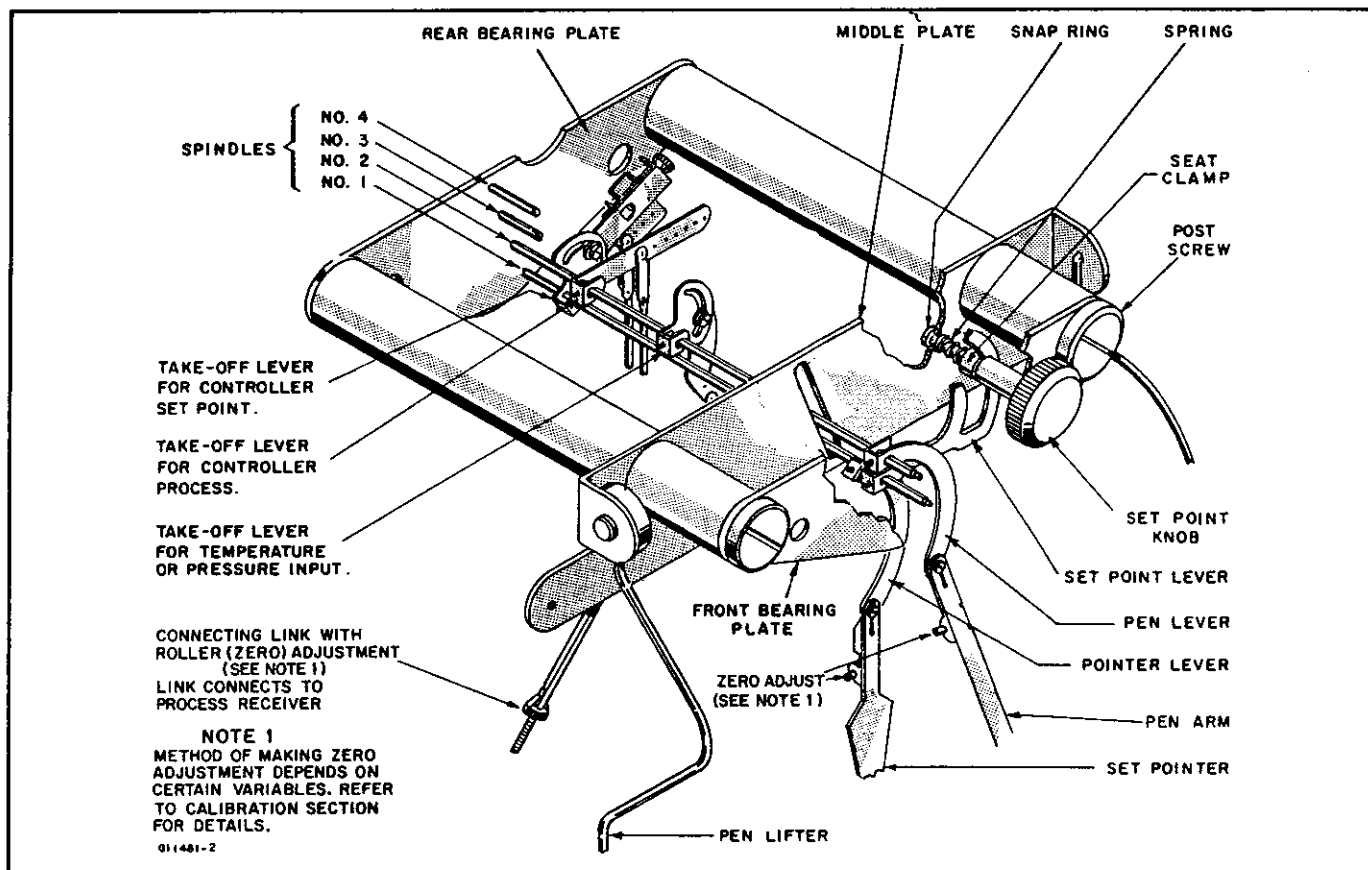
INSTRUMENT SPINDLE ASSEMBLY
